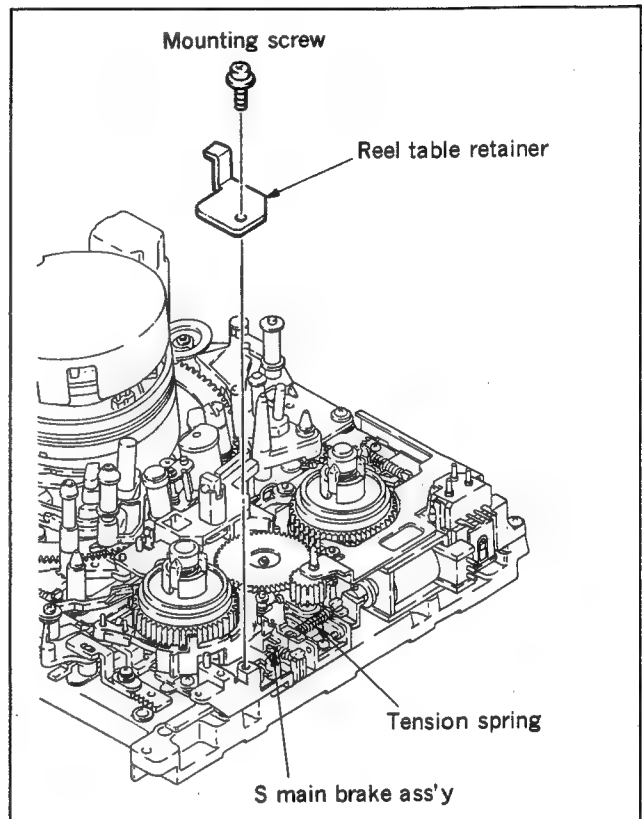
Reel table retainer removal and tension spring removal.
